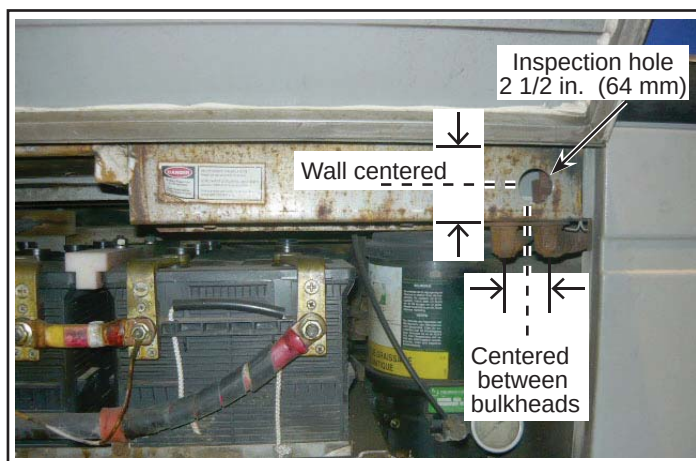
Location of the Inspection Hole to Drill in the Wall
